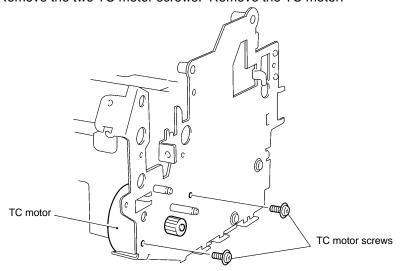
Disassembling the Right Side of the Chassis (2)
